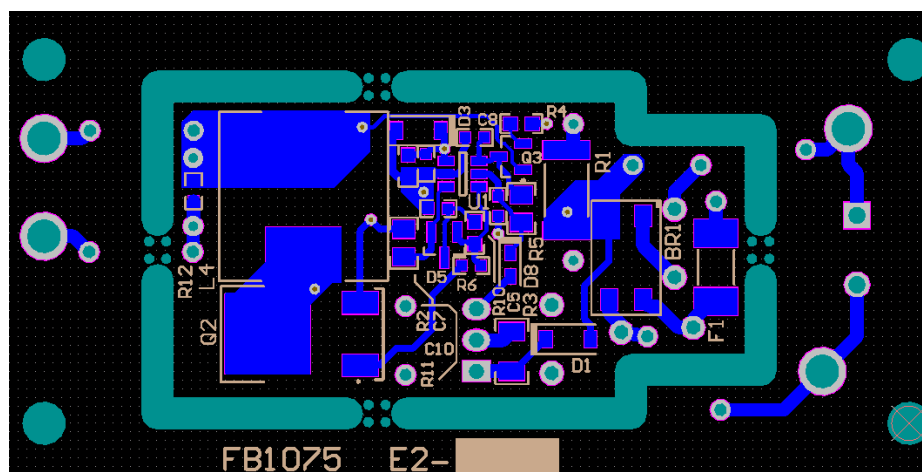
TPS92075 Buck EVM Bottom Assembly Drawing (Bottom view)
